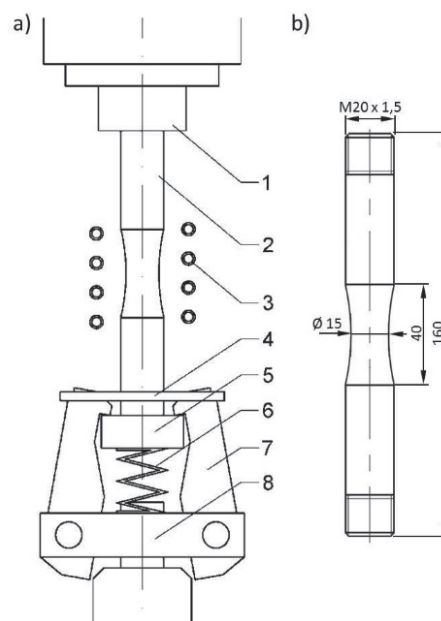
Tensile testing equipment “BETA 250-5” (1. tension arm, 2. tensile specimen, 3. induction coil, 4. securing ring, 5. holding ring, 6. steel spring, 7. gripper arm, 8. extractor unit); b) geometry and dimension of the tensile specimen in mm [13]
